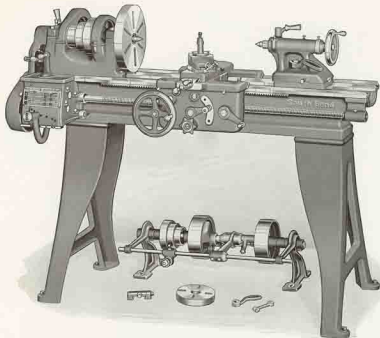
Cat. No. 11-A, 11" x 6' Series "R" Quick Change Gear Countershaft Drive Lathe complete as shown ..... \$433.00
